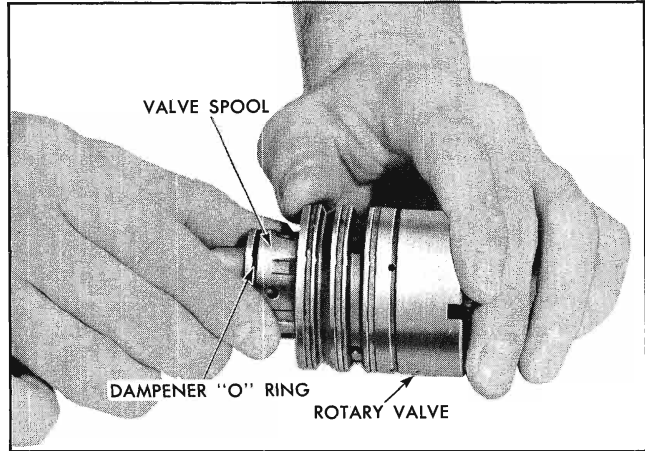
A-16 Removing Valve Spool from Rotary Valve
